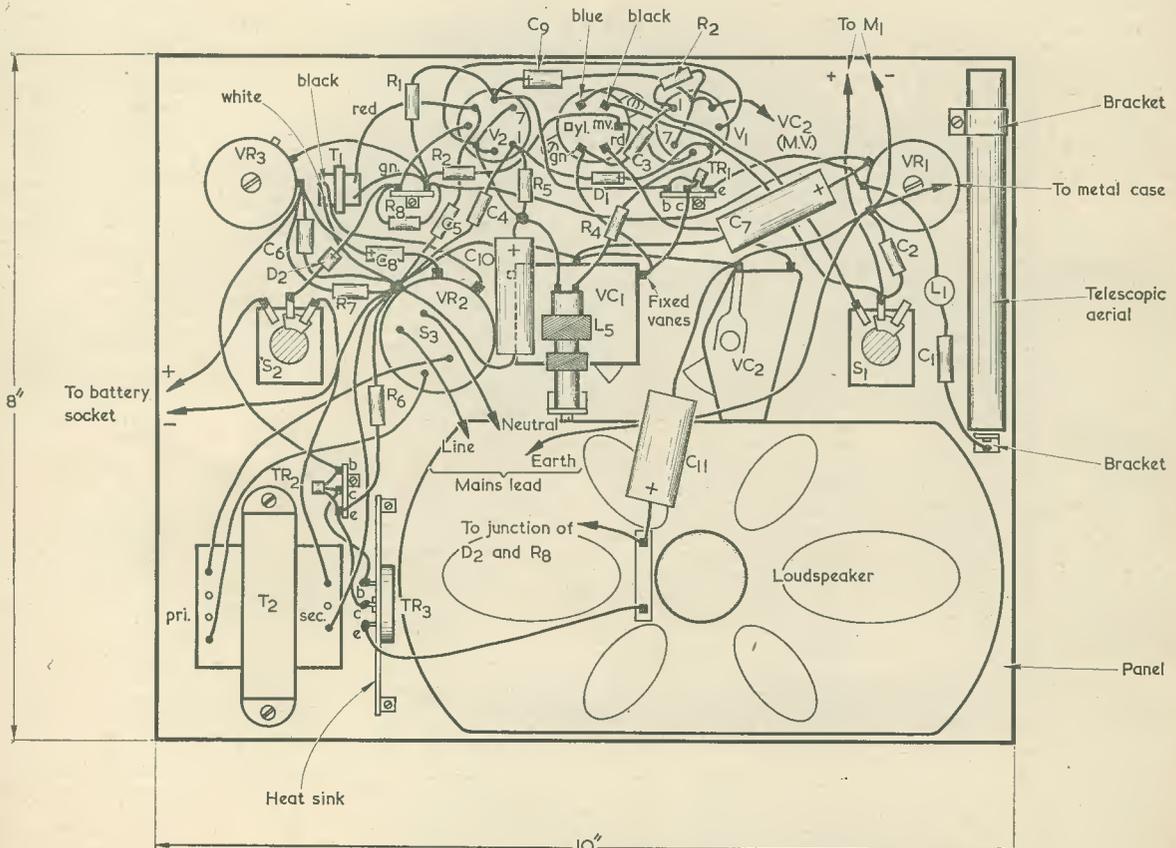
Component layout and wiring. The two valveholders are shown turned through 90° to illustrate the wiring to their tags
